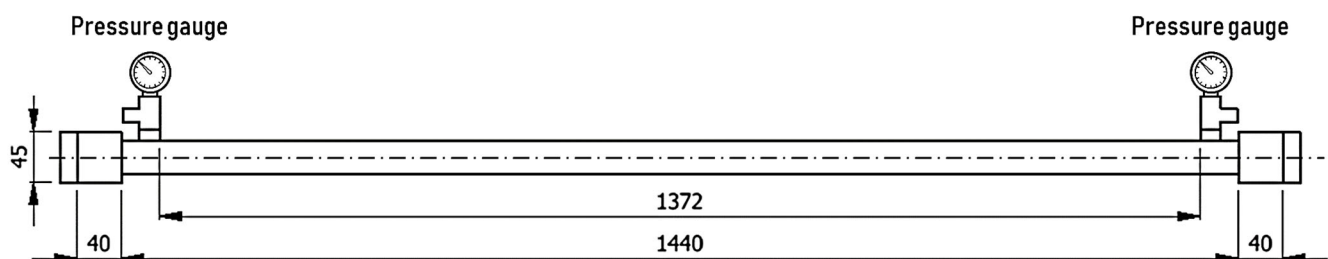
The receiver tube schematic diagram, dimensions in mm.
